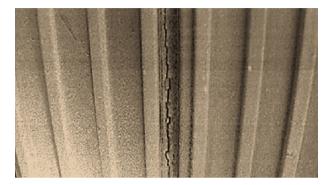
Fatigue crack in the front gland heat groove.
